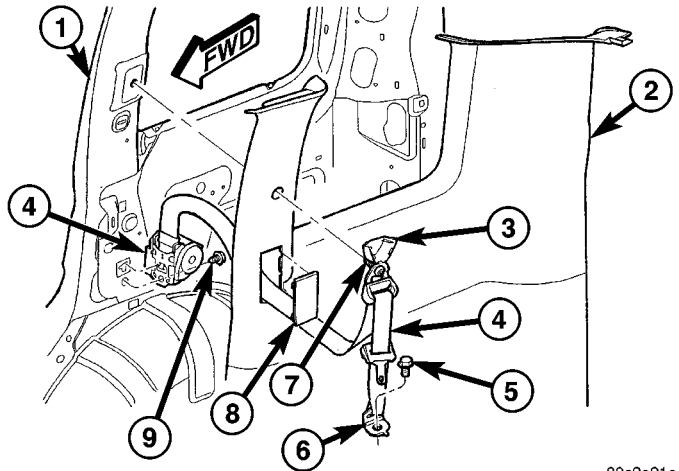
Rear Outboard Seat Belt & Retractor Remove/Install
